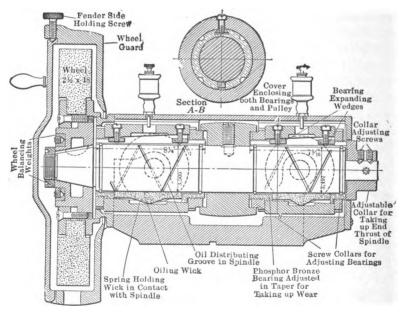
Section through Landis plain grinder—wheel, spindle and bearings.
